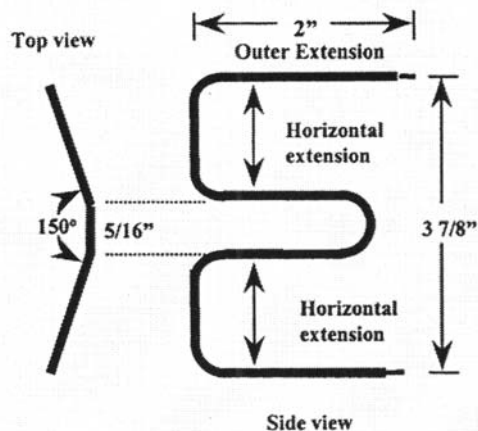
Stainless Steel Spindel Schematic (top view and side view).
